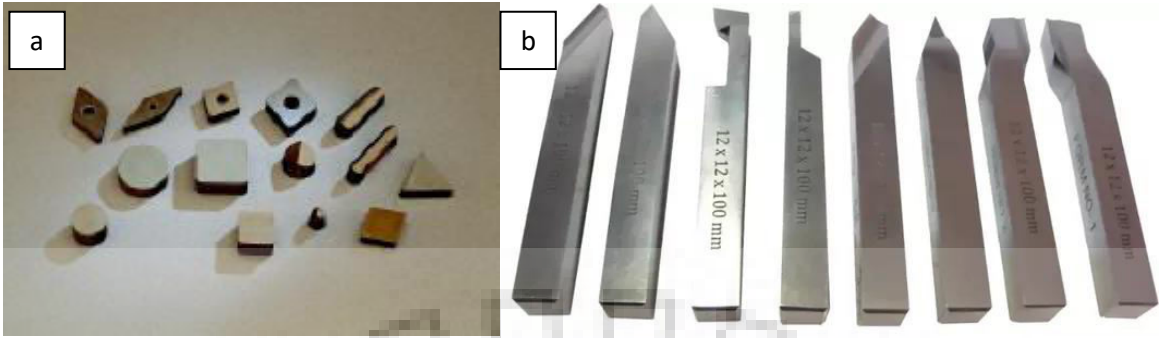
(a) SiC based cutting Tool inserts (b) SiC based cutting tools [19]
